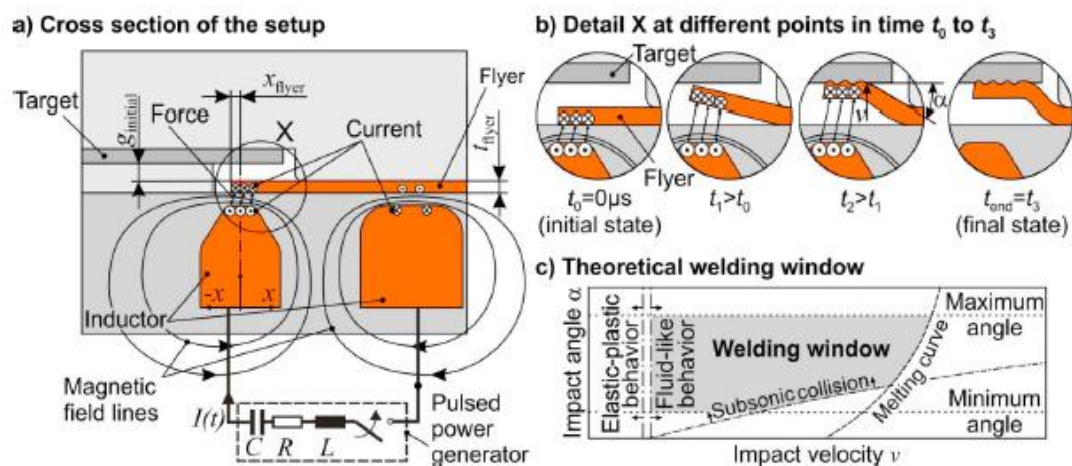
(a) Cross section of the setup; (b) Forming states; (c) Theoretical welding window according to [33]
